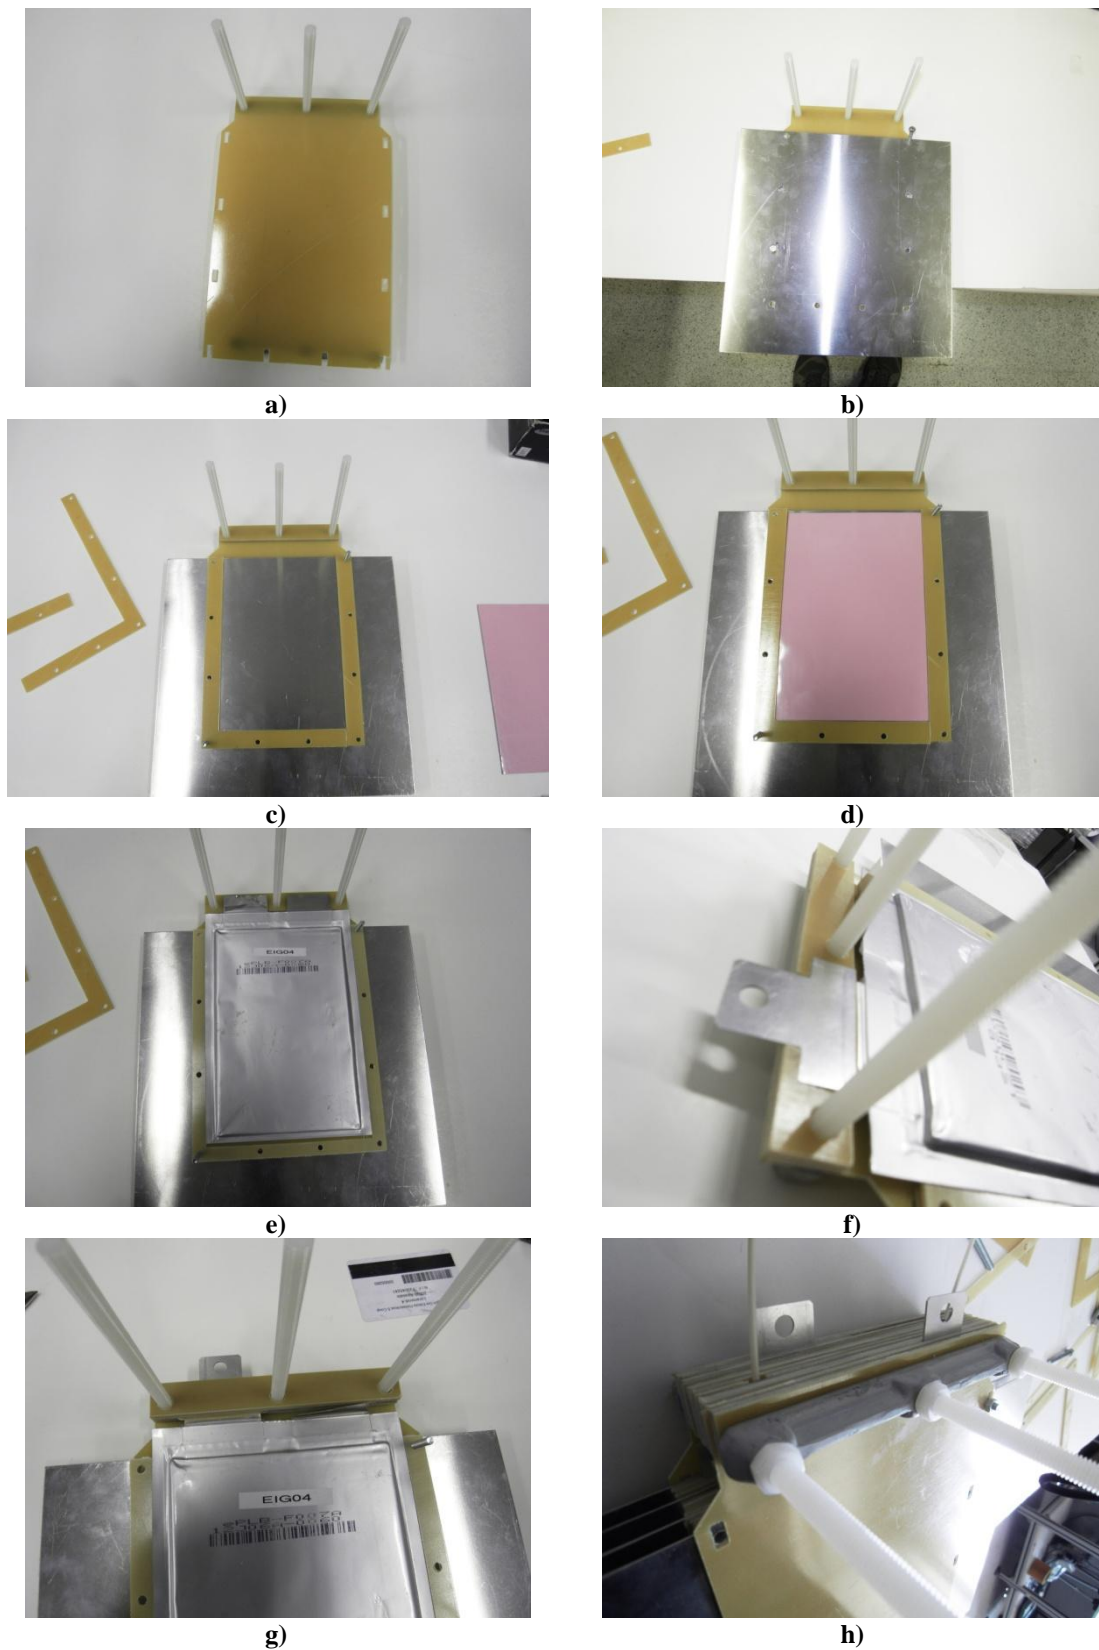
Pouch module assembly process; a) Cover layer; b) Heatsink; c) Cell holder; d) *TIM*; e) Including pouch cell; f) Power terminal; g) Layered terminal structure; h) Overall structure.
